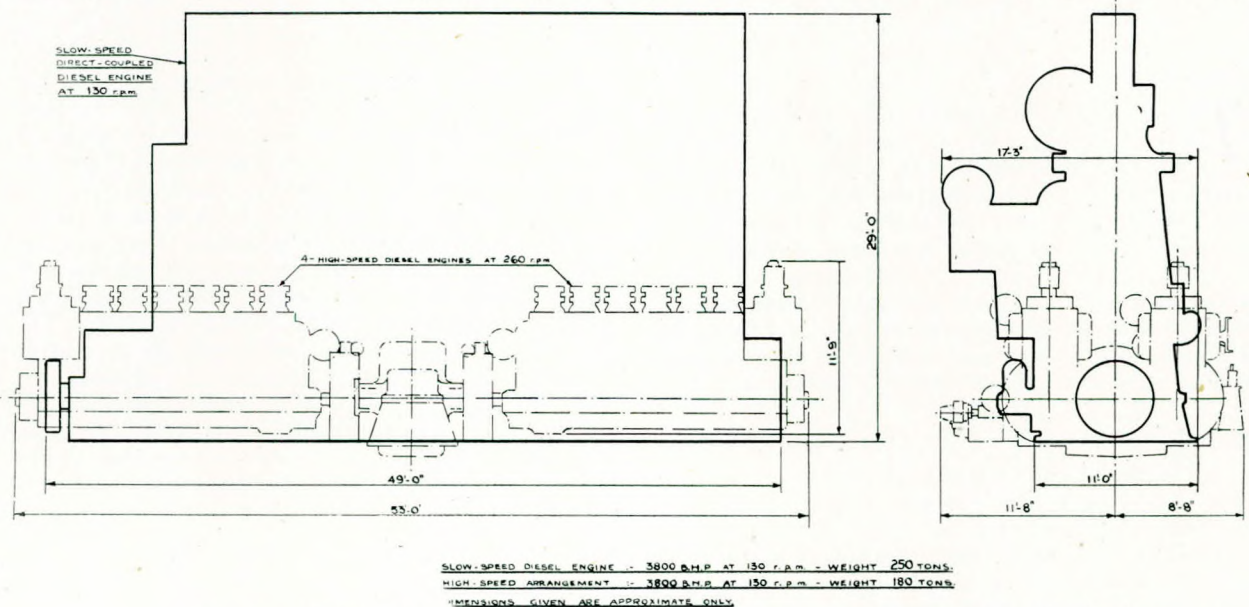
Comparison of slow-speed diesel engine and high-speed engines with geared drive.
